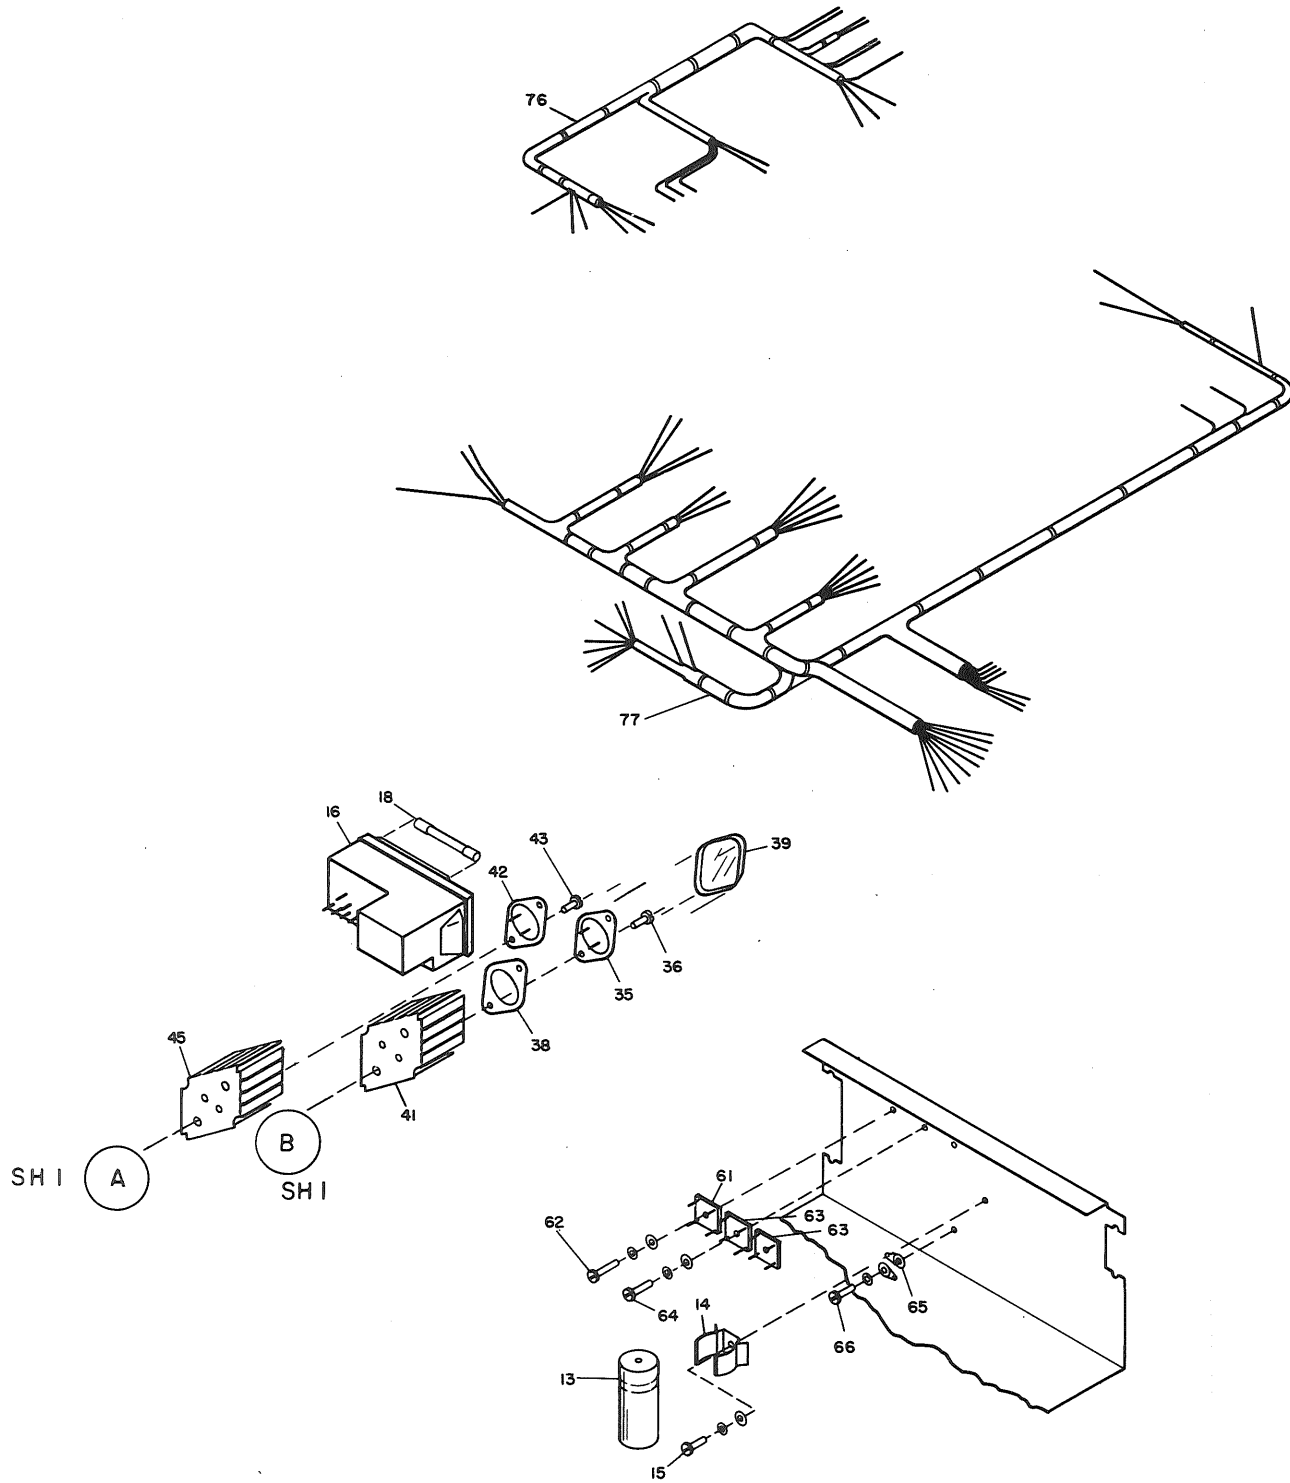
Power Supply Assembly, Module, A10 (Sheet 2 of 2)
